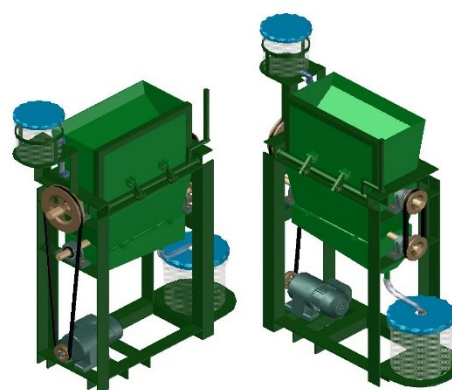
Isometric views of the Machine from 1st and 3rd angle
